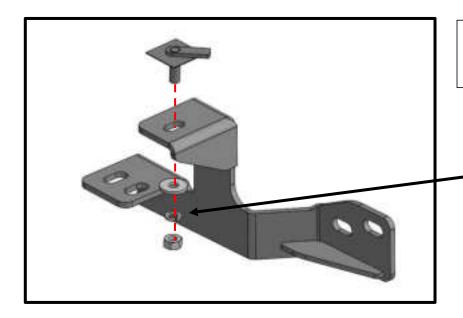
Insert the Bolt Plate to the pictured hole and attach the Plastic Retainer.
